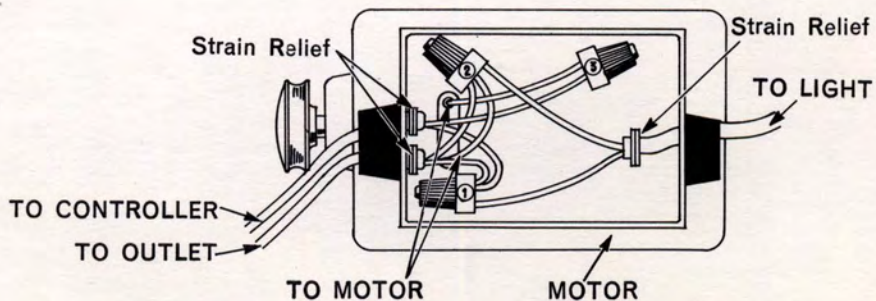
B.Z. 60 Motor Terminal Connection Guide.
